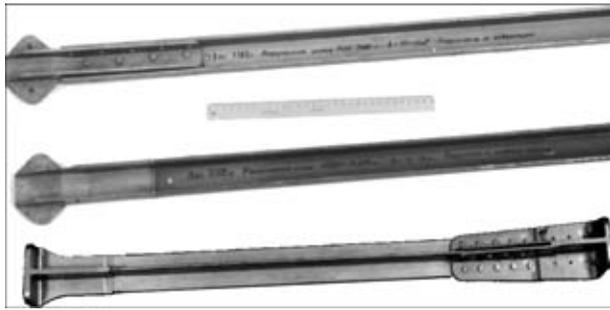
Riveted and welded joint of dissimilar alloys on aluminium base of fitting–stringer elements used in aerospace industry
